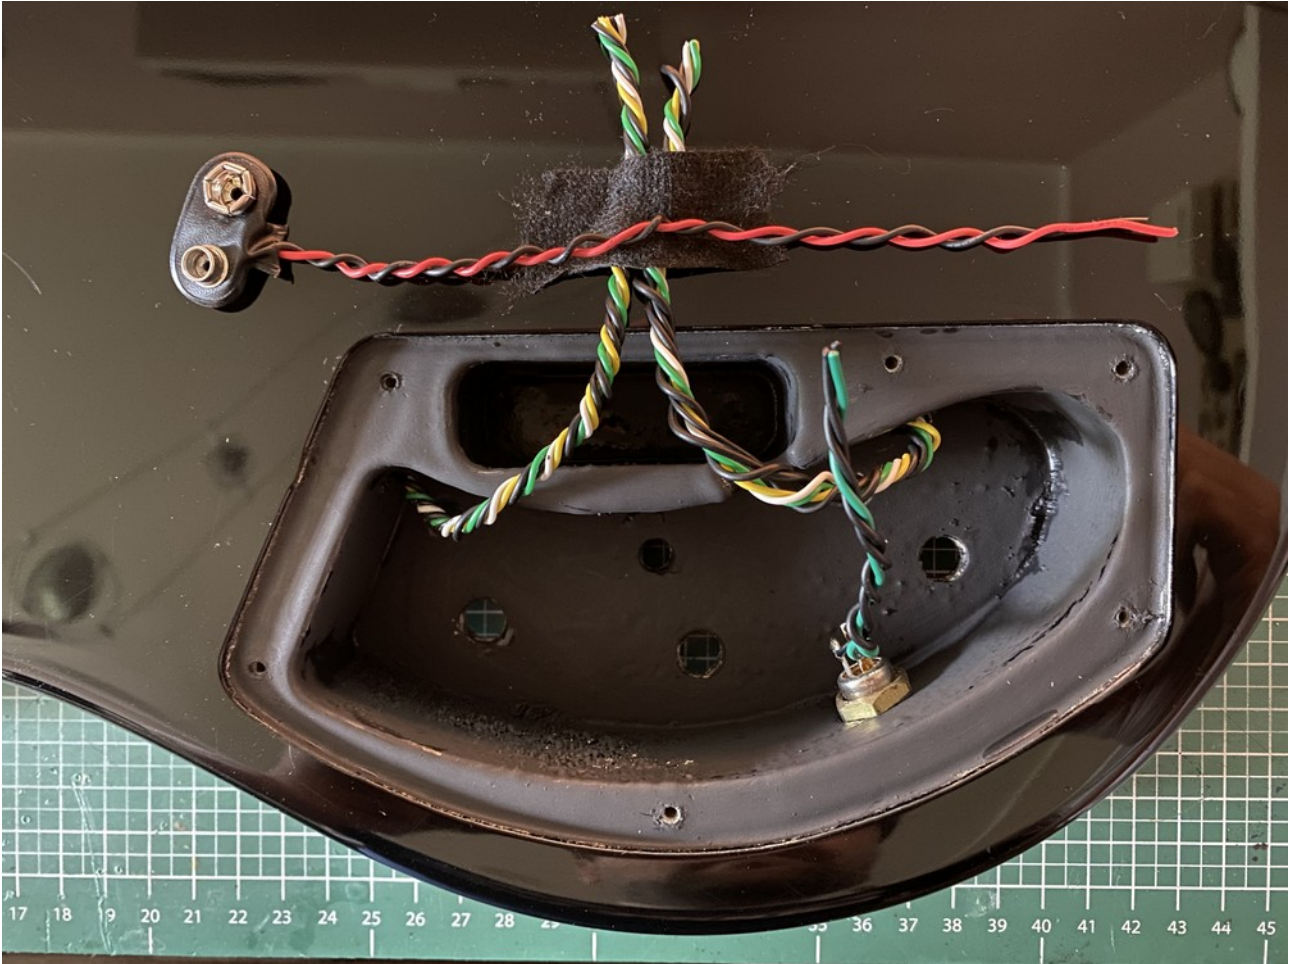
remove toggle switches and pots from housing. Cut wires at appropriate lengths. Desolder black battery connector wire from audio jack, solder a black wire to (now unconnected) terminal on audio jack
